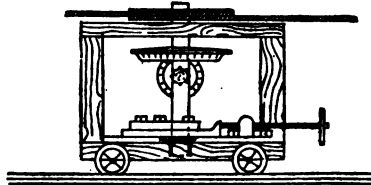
Bower and Blackburn's coal-cutter: elevation.
